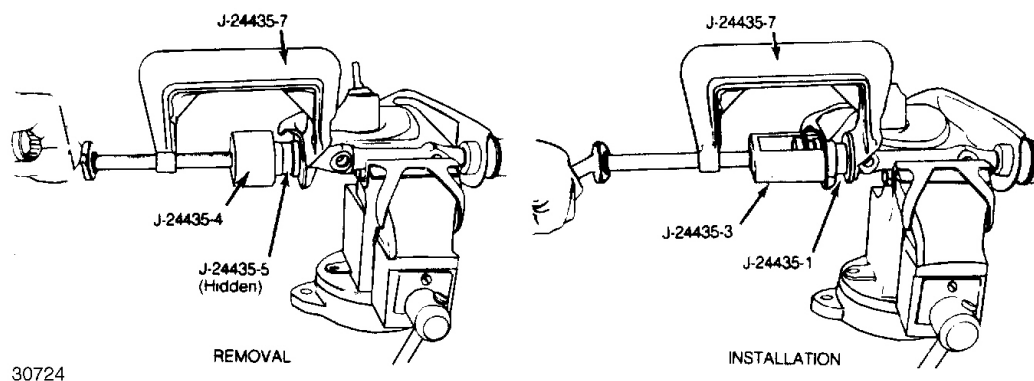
Upper Control Arm Rubber Bushing Replacement Tighten hex head on clamp to draw out old bushing, then reverse procedure to install new bushing.
